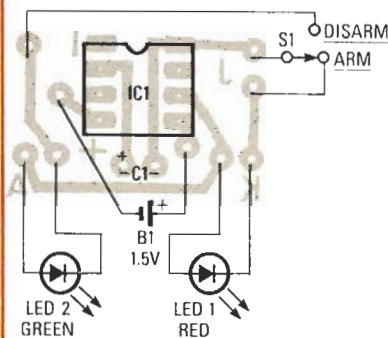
THE CIRCUIT CAN BE BUILT on a tiny PC board. The pattern is provided in our PC Service section.
